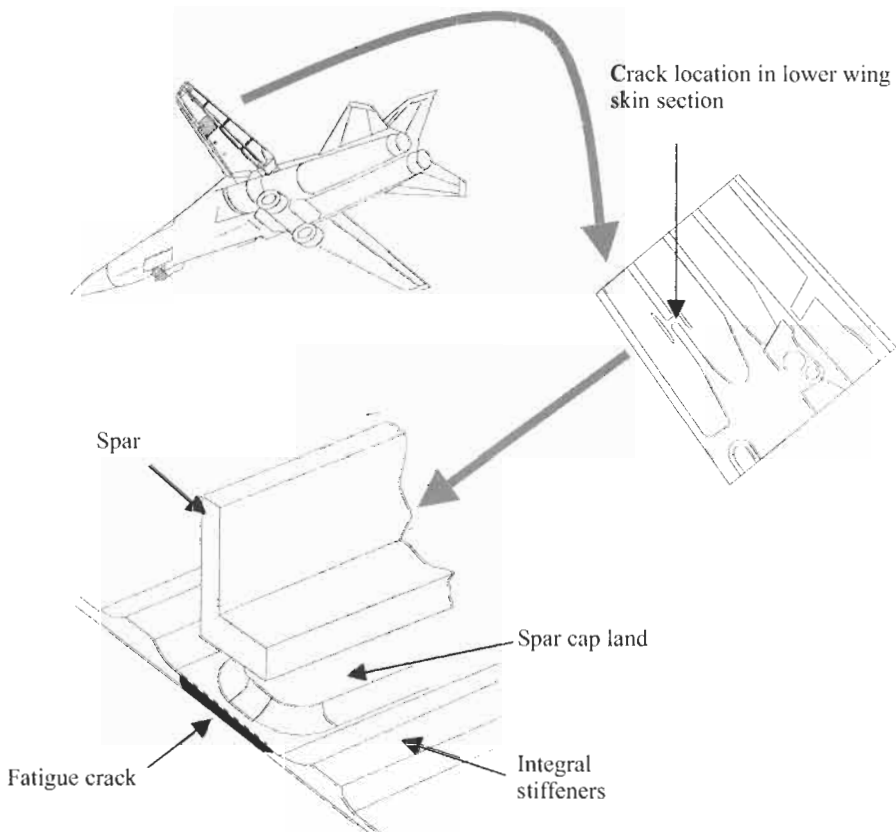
Fuel flow passage area of F-111 lower wing skin.
